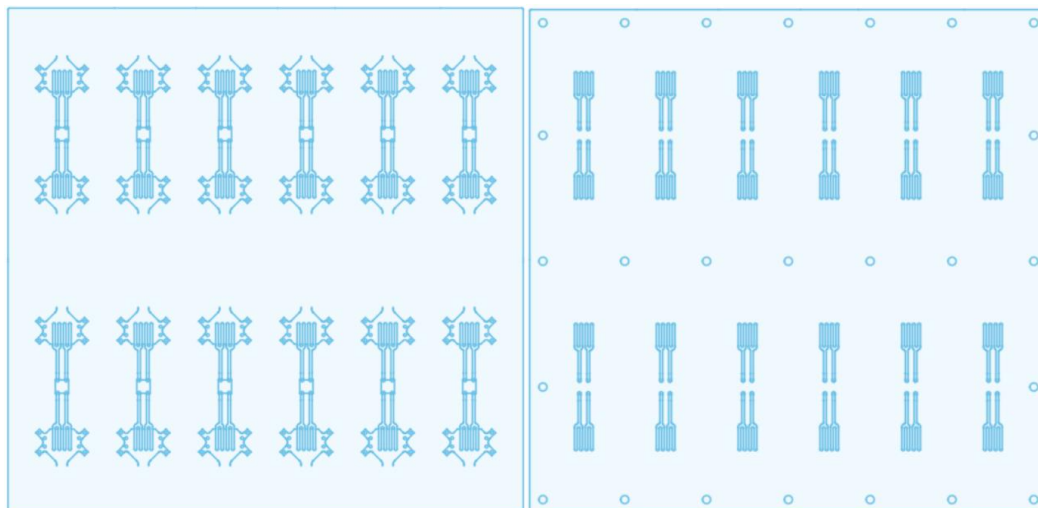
a: engraving design, Figure A.2.b: stencil design
